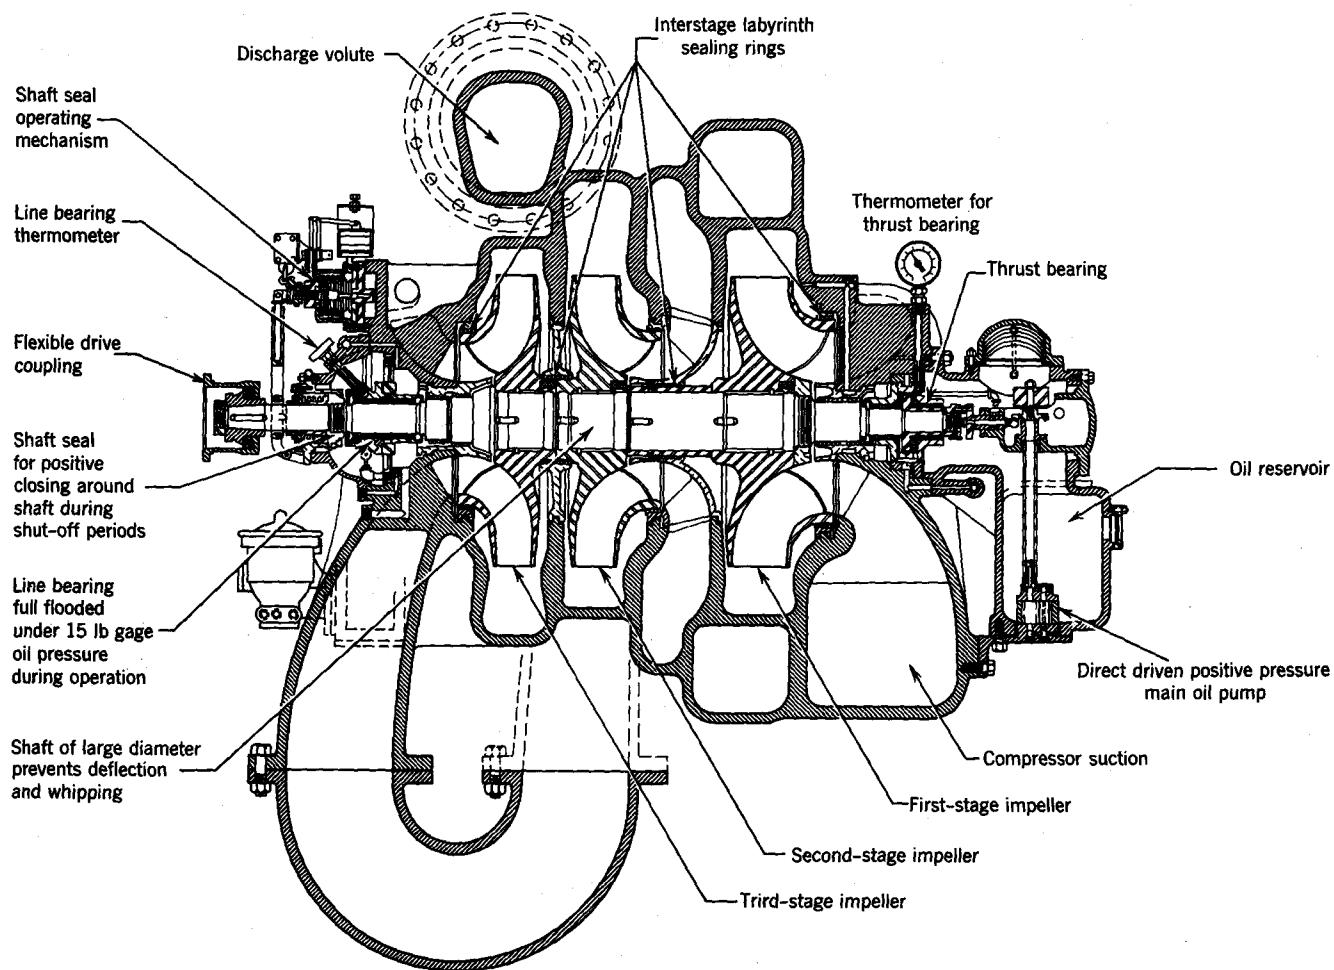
Sectional elevation of three-stage volute centrifugal compressor. (Courtesy Worthington Corporation.)
